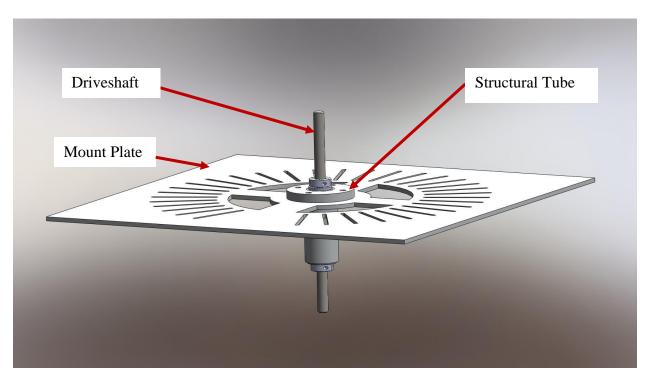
Assembly of the drive shaft, structural tube, and mounting plate.
